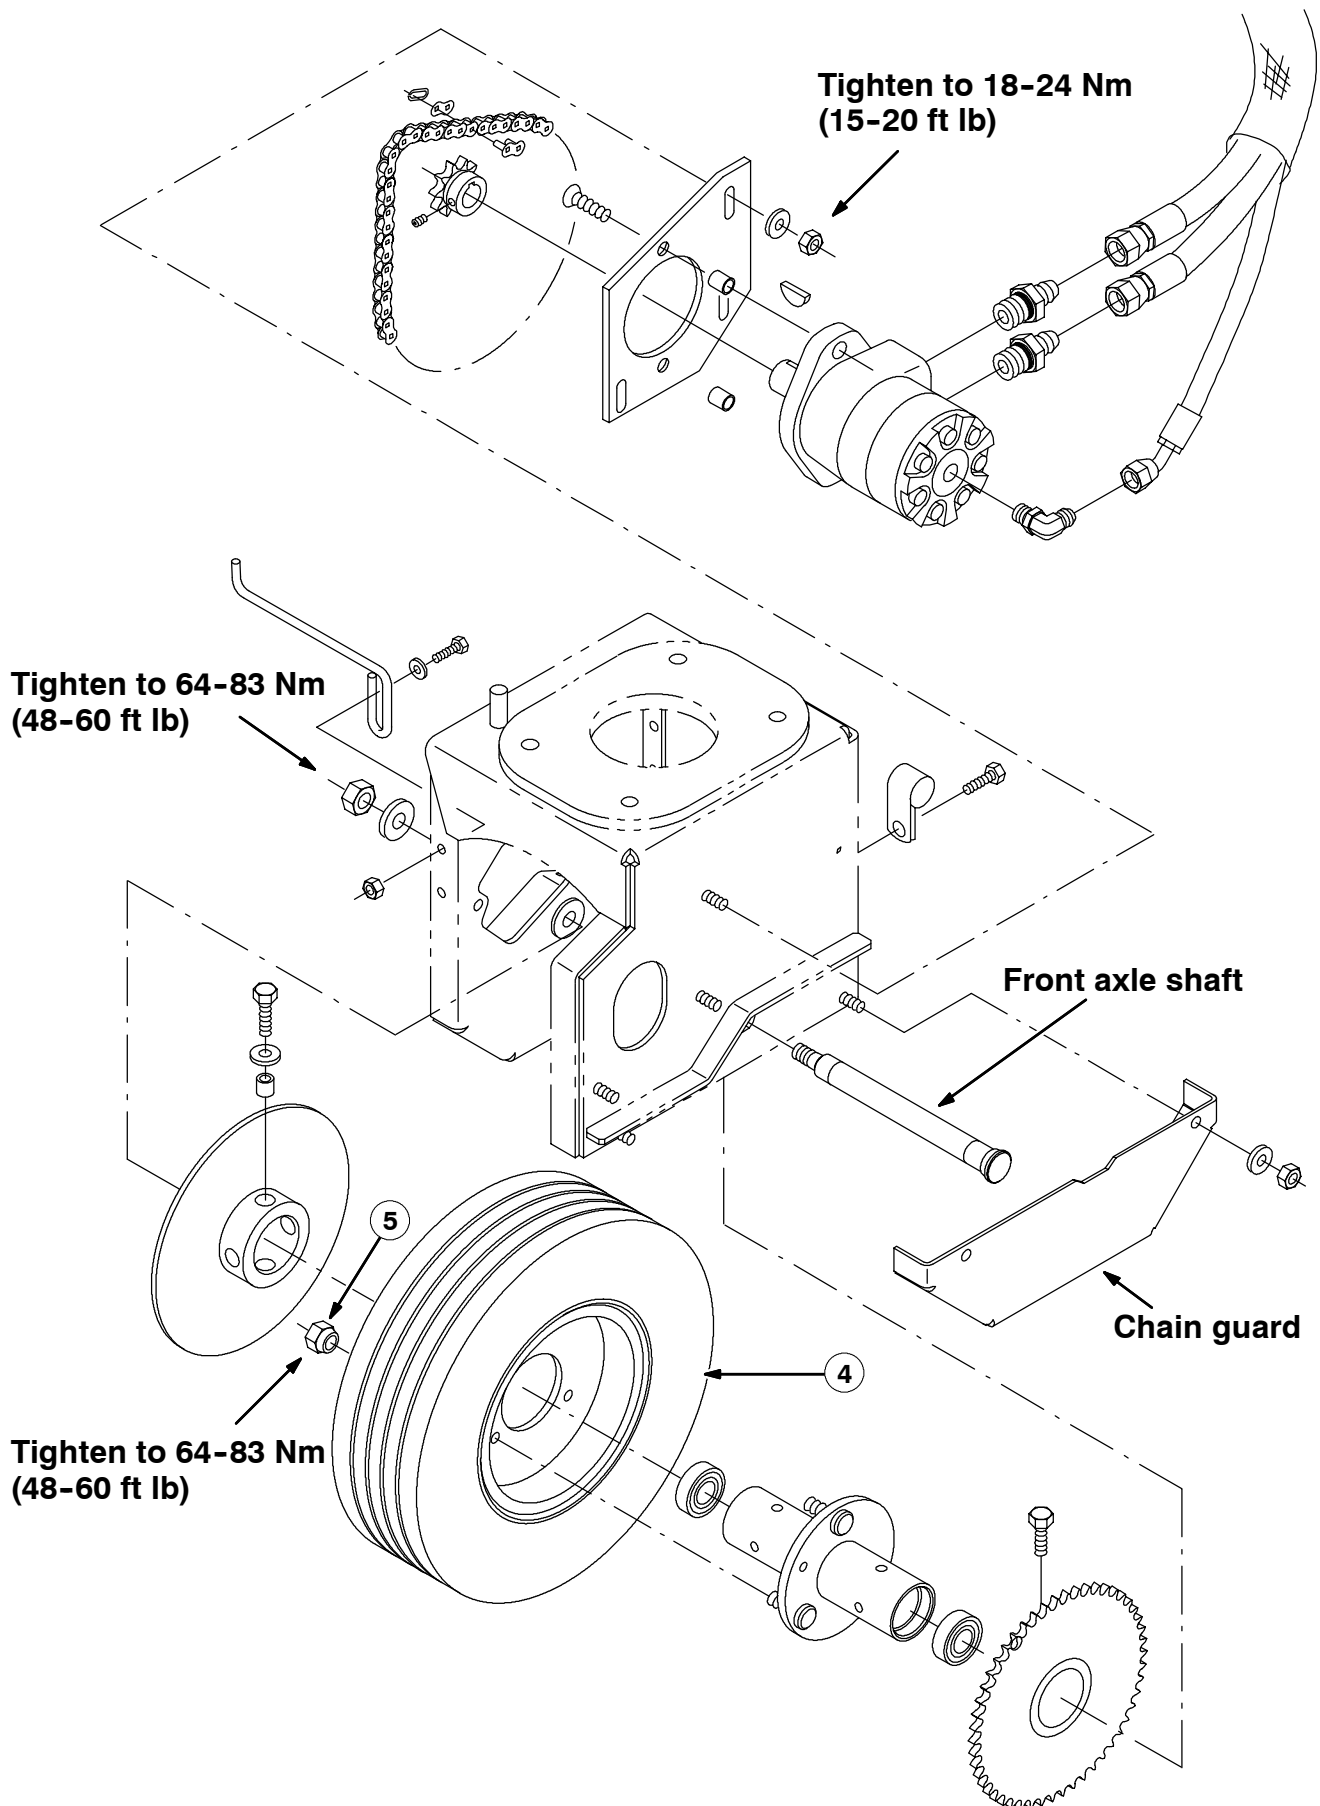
Front Drive Wheel Group, Gas and LPG machines
